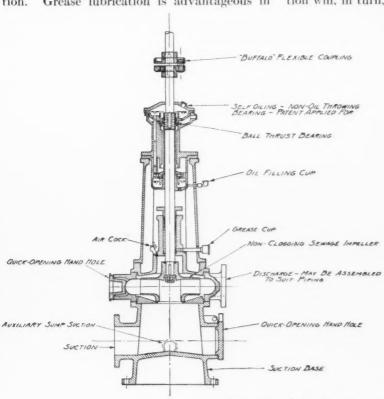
Line view showing the design of a Buffalo Vertical Raw Sewage Pump with all parts plainly indicated.
